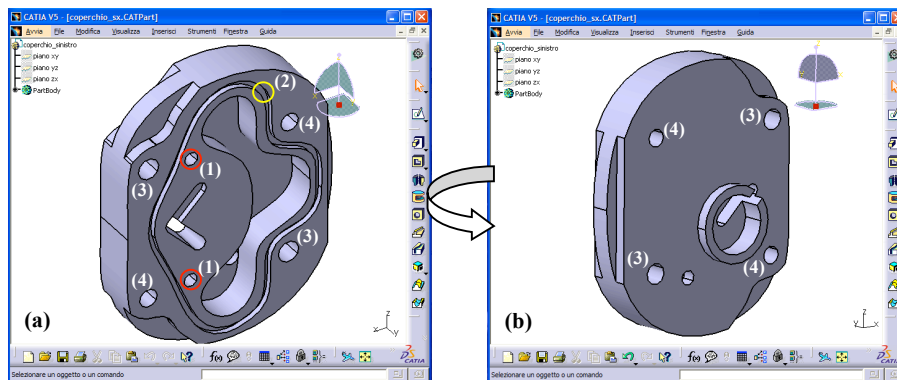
Flange geometry, (a) front and (b) rear view.
